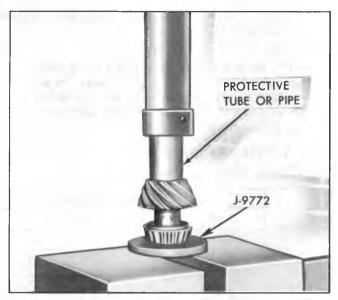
B-Drive Pinion Cone and Roller Assembly Installation (Heavy Duty)
